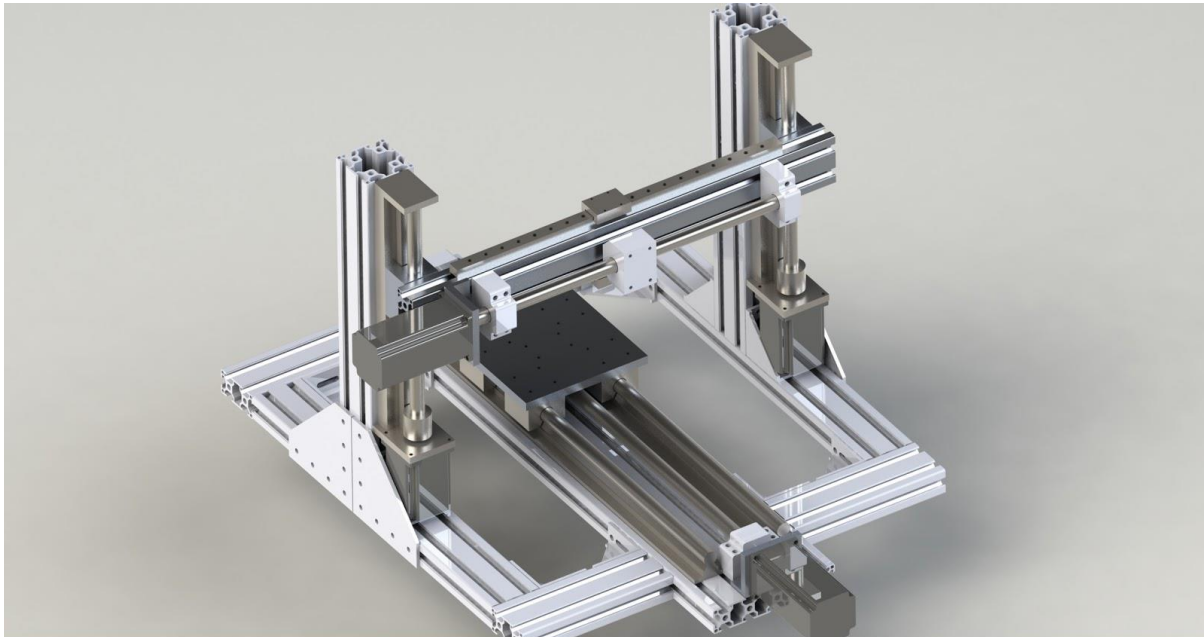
X-axis with linear guides, ball screw and stepper motor.
